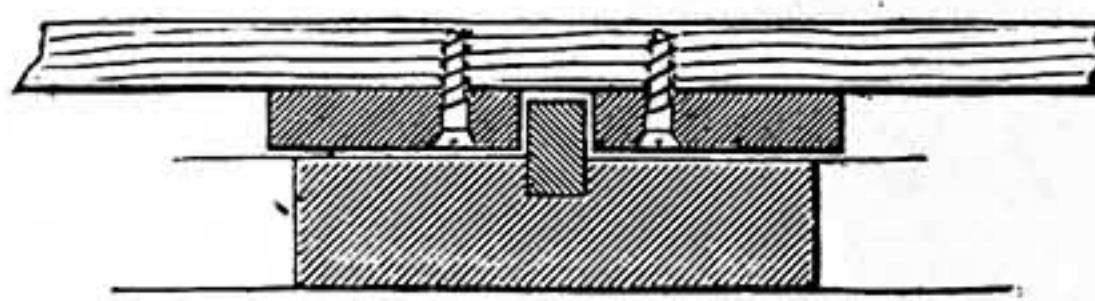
Enlarged Section of Drawer on Line *a b*, Fig. 1.
